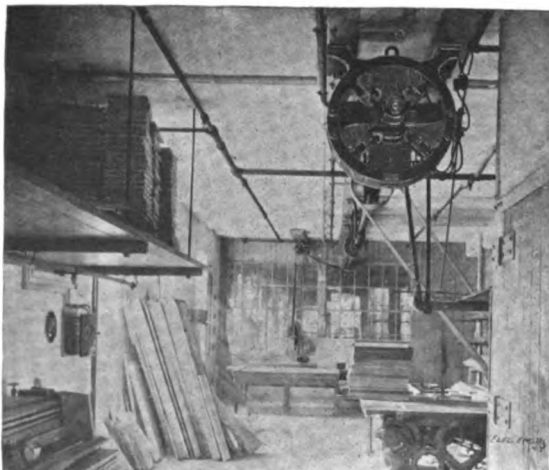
MOTOR DRIVING CARPENTER SHOP.
